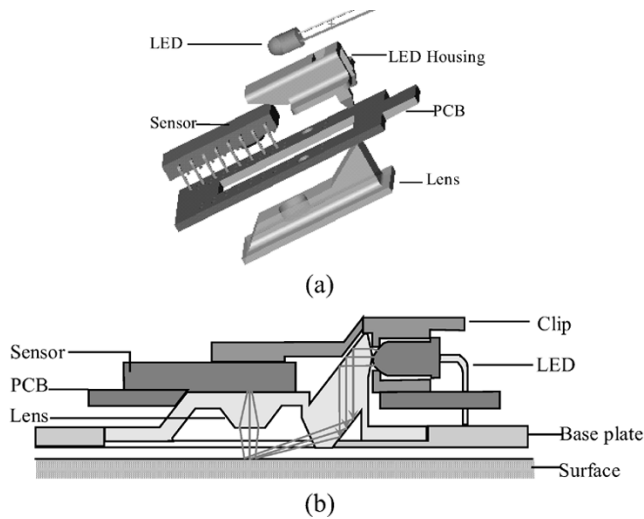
Optical sensor schematic. (a) Exploded view of an optical sensor; (b) assembly view illustrating the principle.
